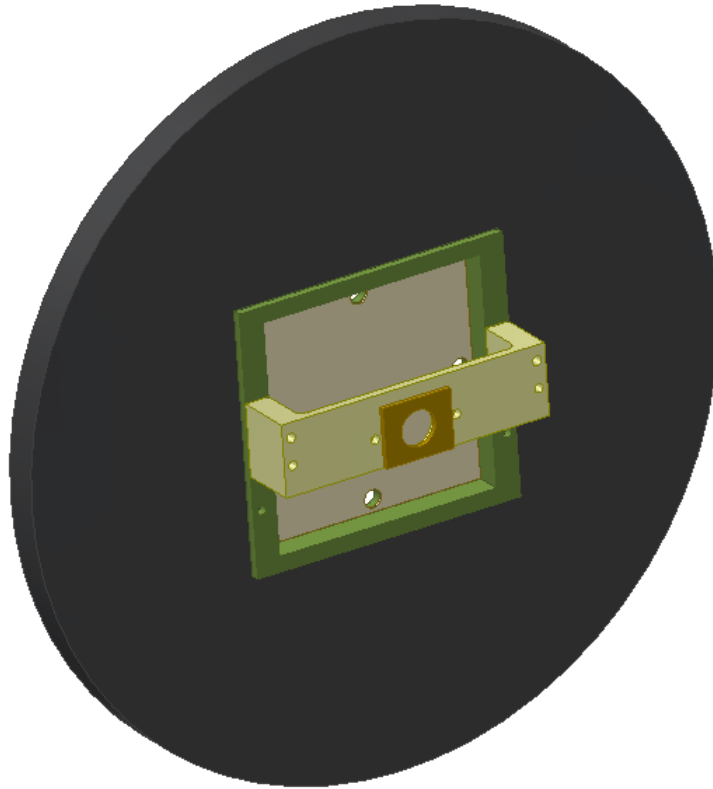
CAD drawing of assembly to hold collimated Th source at a fixed distance (target position) from the mask on FAUST frontplate.
